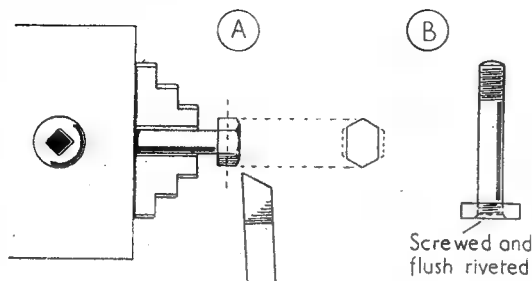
(A) Making a T-bolt from hexagon-headed bolt; (B) Using round material to make a T-bolt
